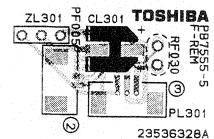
U0015 F-REM PC Board (Top Side)
